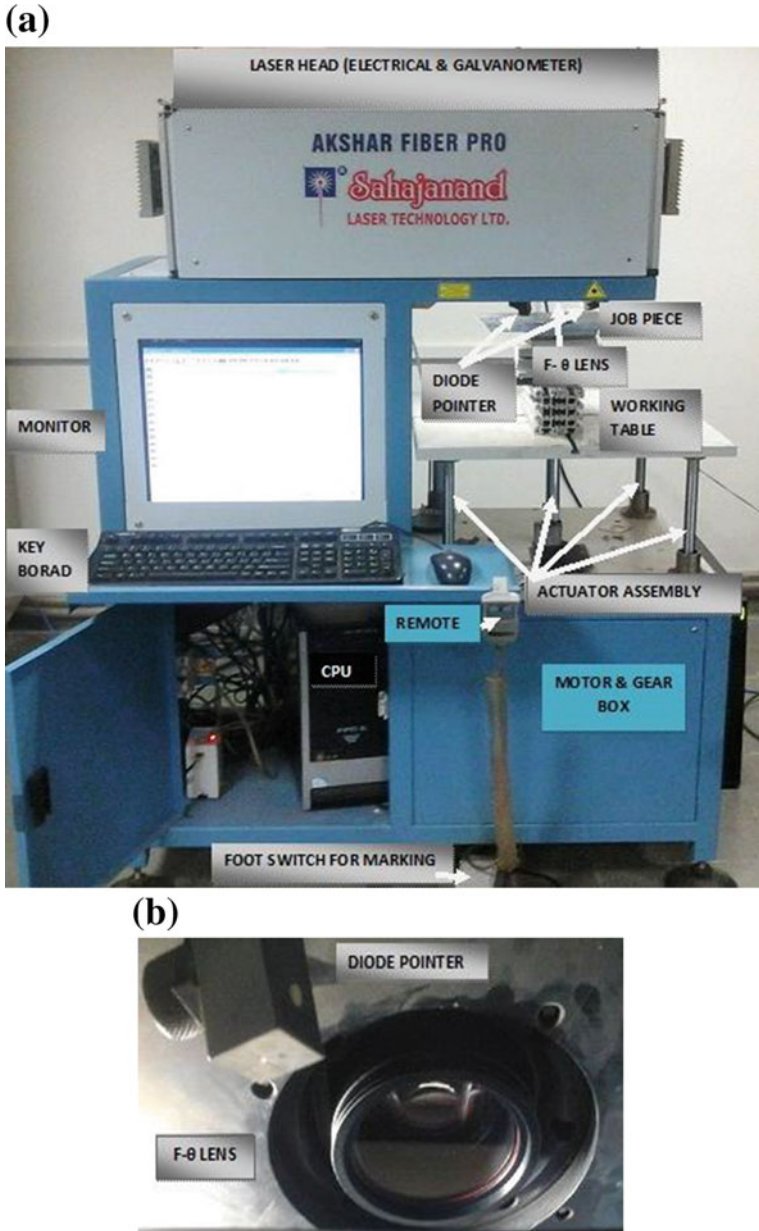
a Photographic view of fiber laser machining system. b Photographic view of lens and diode pointer (Courtesy of Sahajanand Laser Technology Limited)
